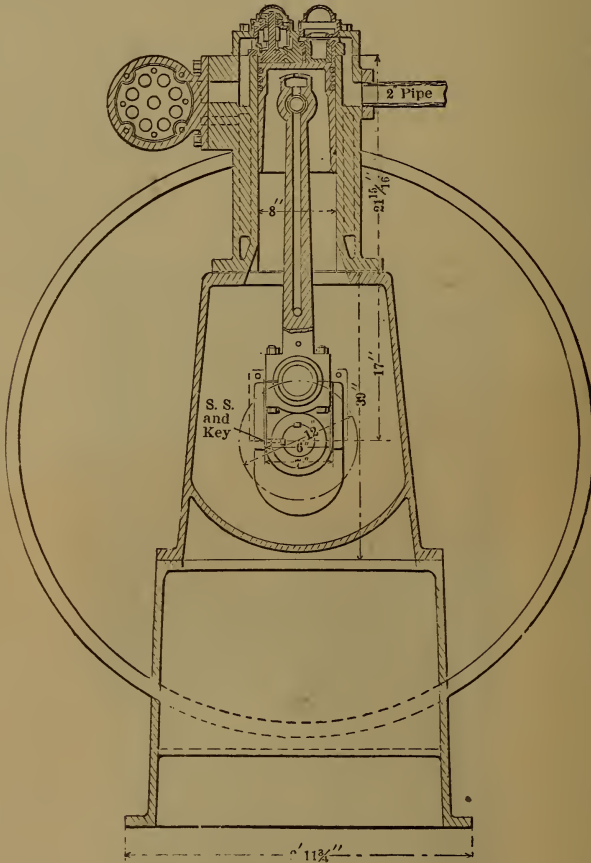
SIDE VIEW OF BELT-COMPRESSOR.
